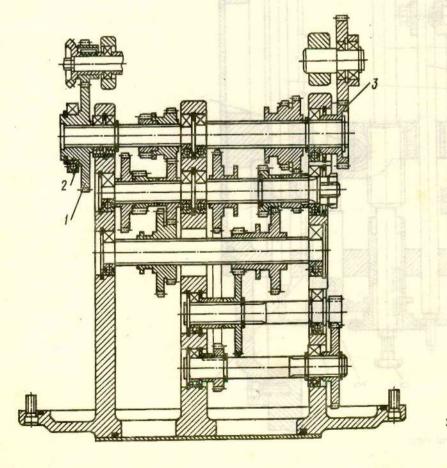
Section Taken Through Main Shafts of Speed Change Gearbox
